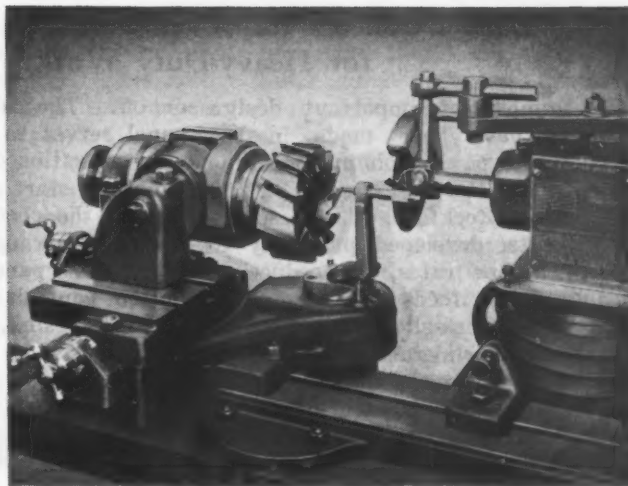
Micrometer Gage Furnished with Grinding Attachment Illustrated in Fig. 1
